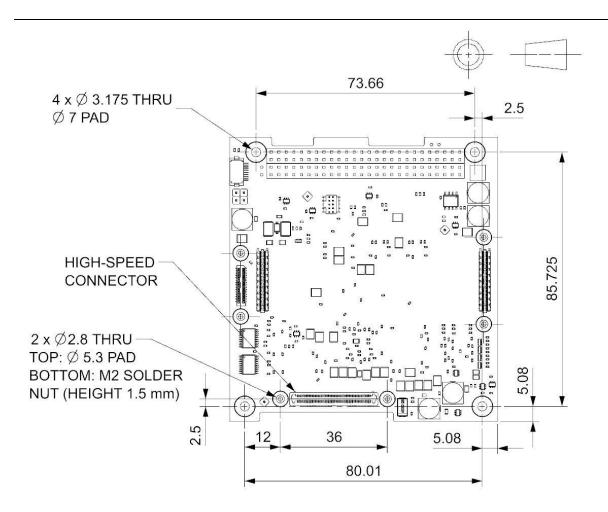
CE and High-Speed Connector Mounting Hole Details
